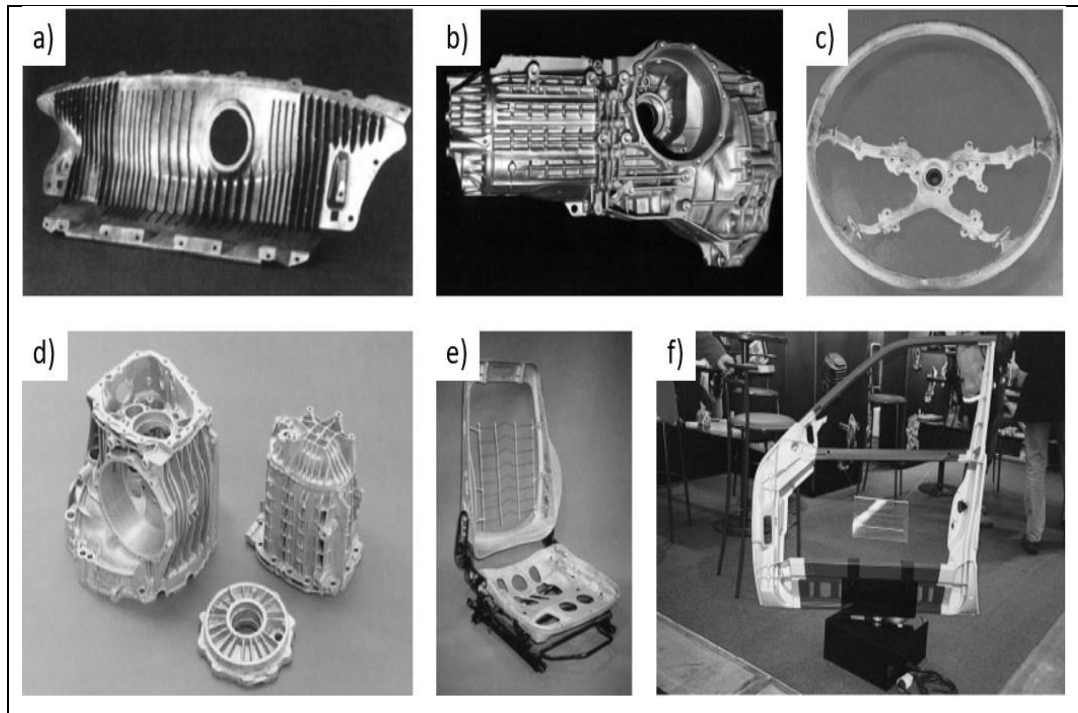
Magnesium auto parts, a) Fuel tank protector, b) Gearbox c) Steering frame d) Gearbox e) Seat frame and f) Passenger door frame [1].
